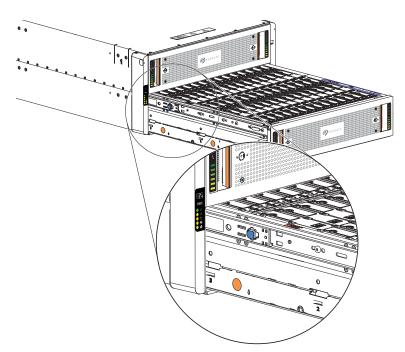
Safety lock to release left drawer slide rail of lower drawer
